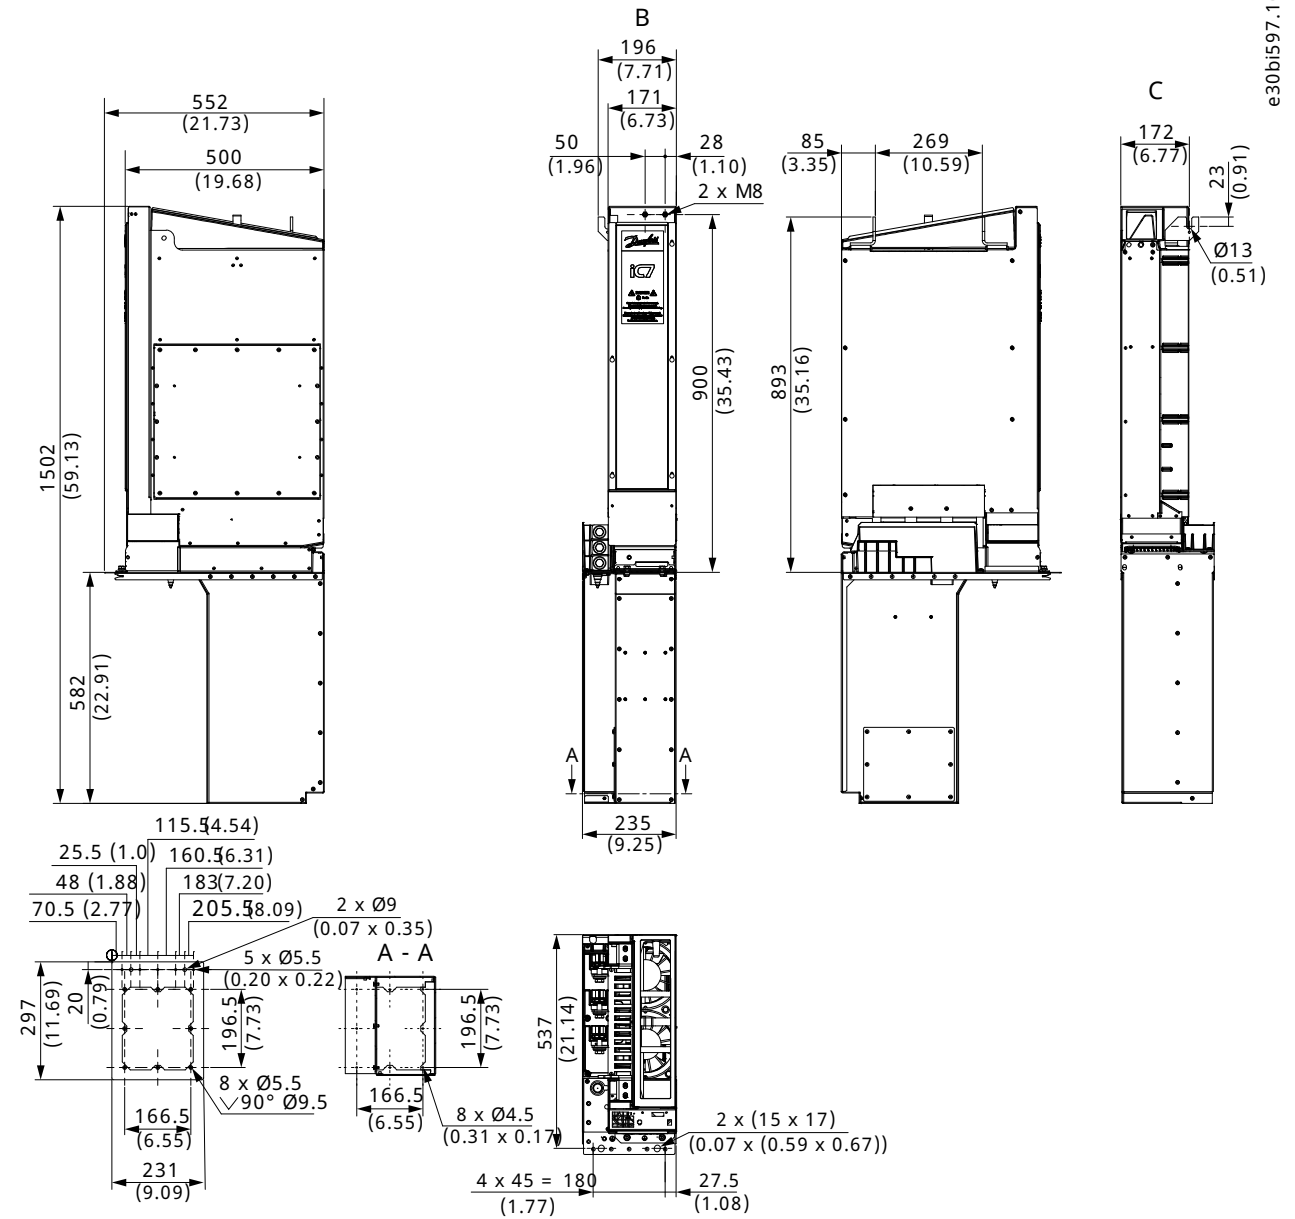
Dimensions of the Inverter Module in mm (in), IR11 with Short Integration Unit
